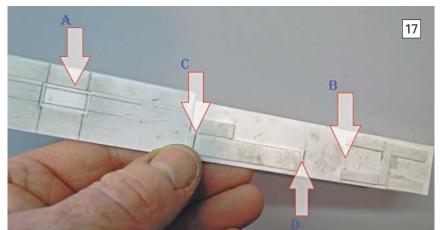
A simple jig from scrap styrene for making all of the standard single panel watertight doors, please see text for more information.
